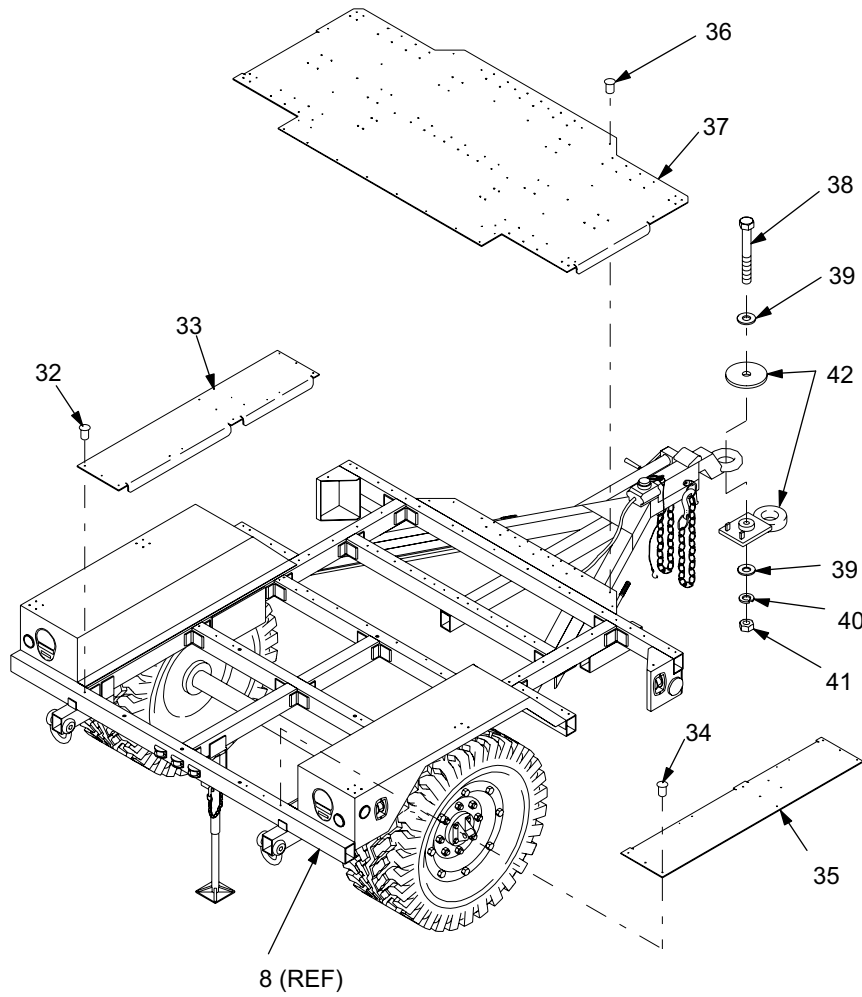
HMT Assembly Repair (Sheet 2 of 3)
